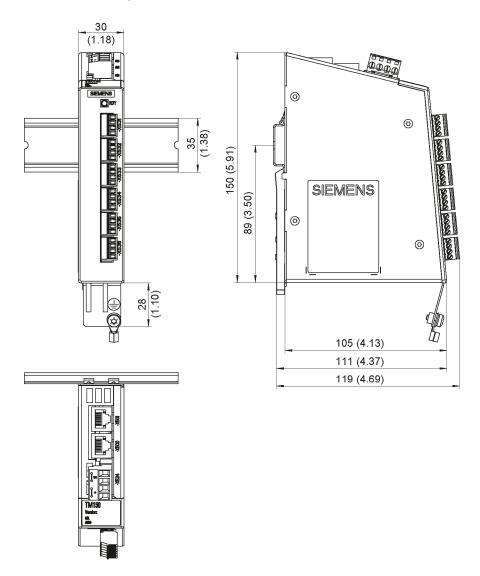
Dimension drawing of Terminal Module TM150, all data in mm and (inches)
